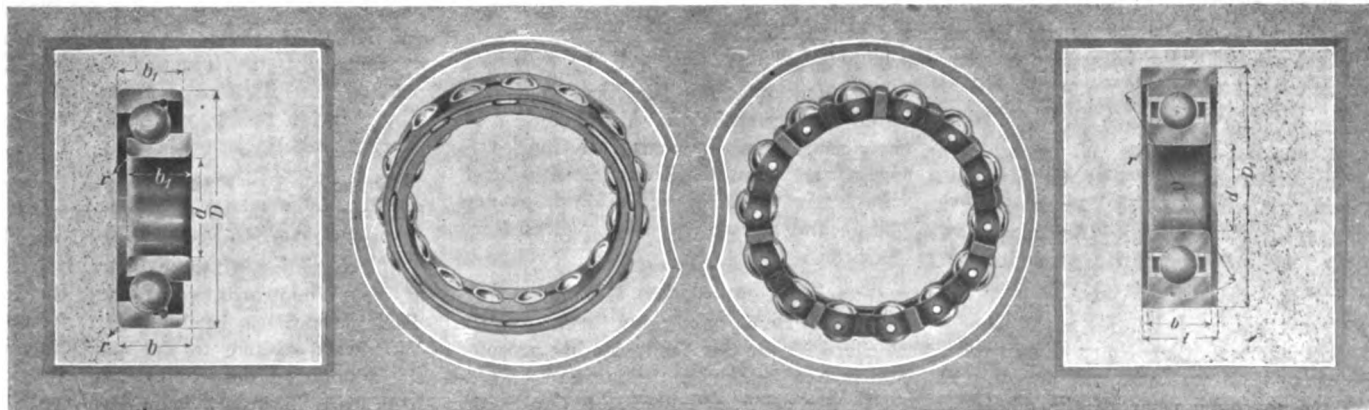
Cross-section of anti-disalignment H. C. B. bearing. Fig. 2—Wire-stitched cage type of ball bearing. Fig. 3—Two-piece steel-cage bearing. Fig. 4—Cross-section of ball bearing for radial and thrust loads combined
